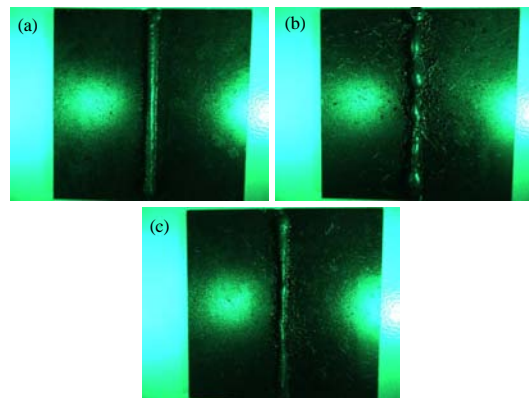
The different category of the weld joints defects in straight line welds joint shapes: a) Excess weld; b) Insufficient wld and c) Good weld
